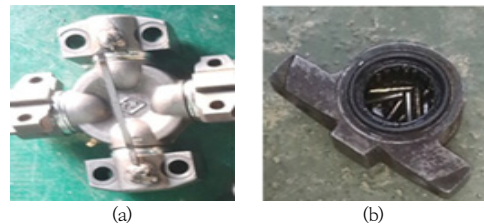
Damage to needle bearing due to wire loss of universal joint
